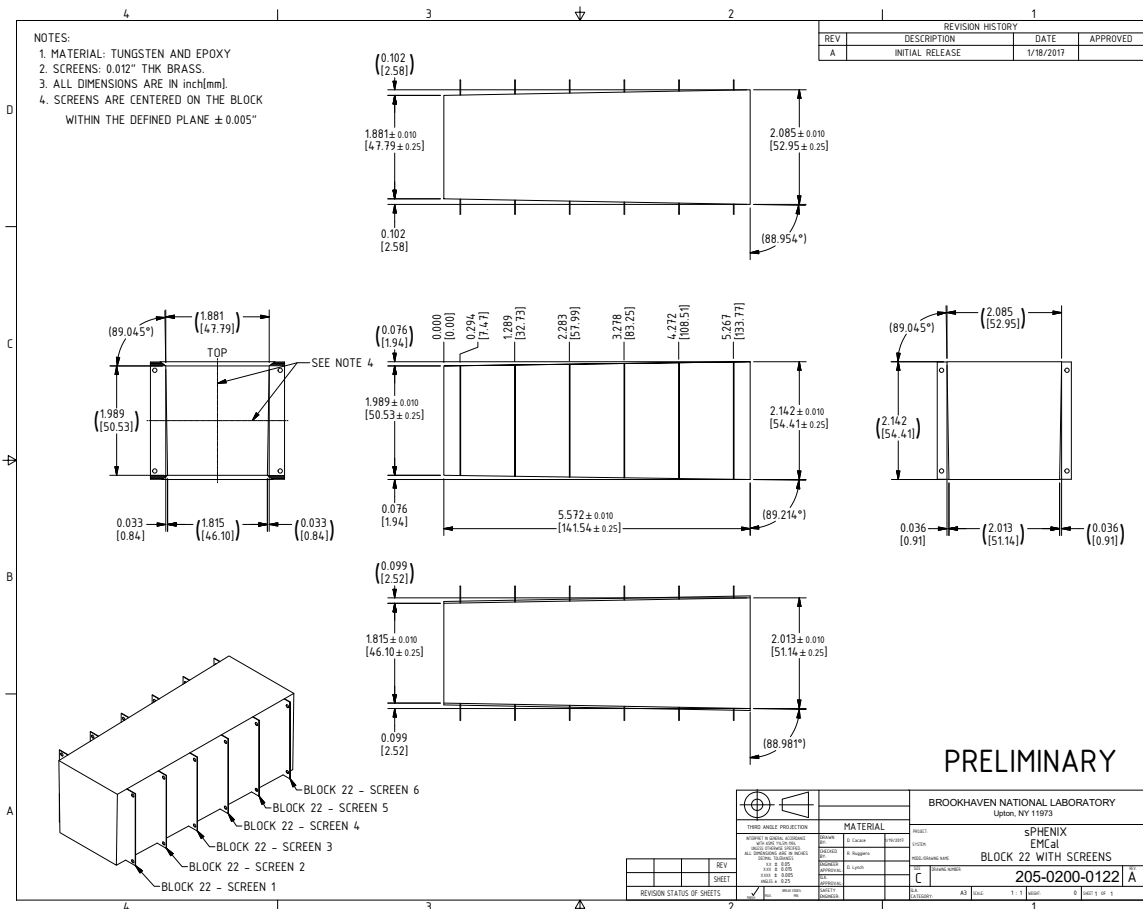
Technical drawing of a 2D projective block produced at UIUC.
